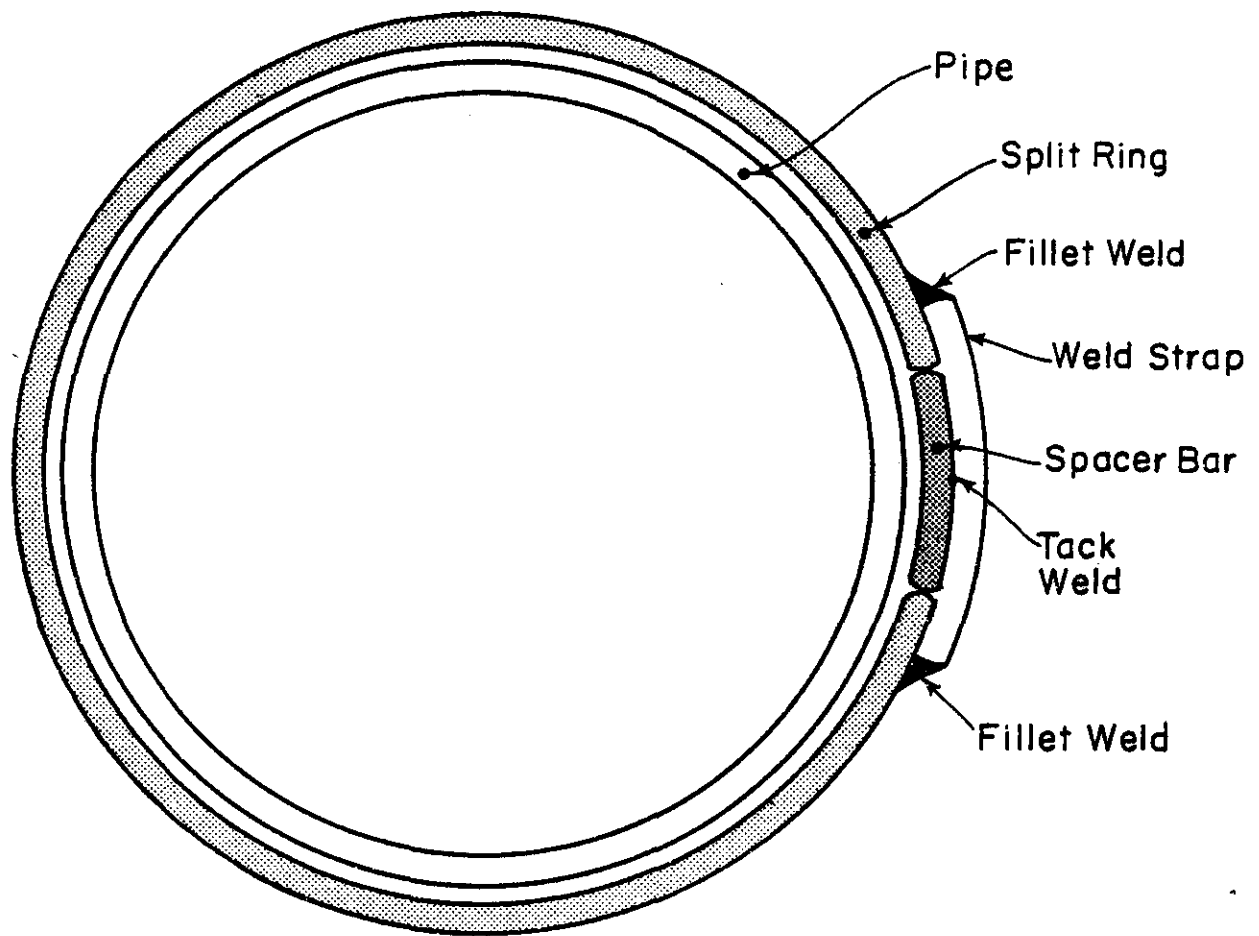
WELDED SPLIT RING SLEEVE ARRESTOR WITH SPACER BAR/WELD STRAP ASSEMBLY IN PLACE
